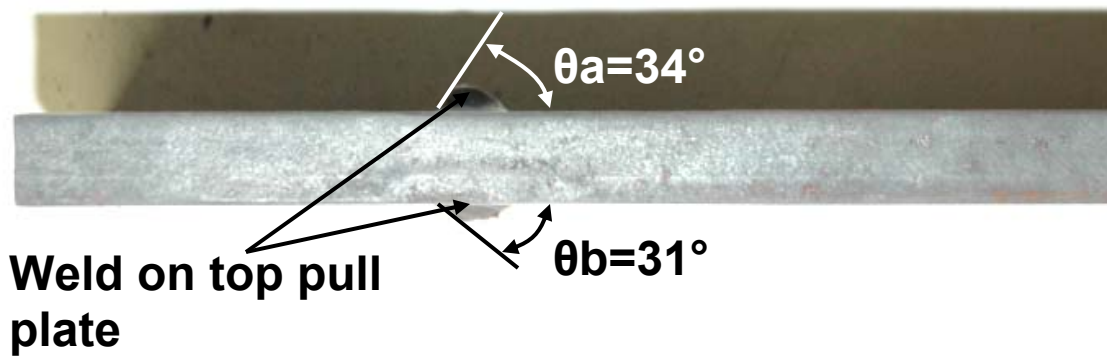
Photograph of a side view Specimen 9, where the profile of the fractured weld on the top pull plate is visible
